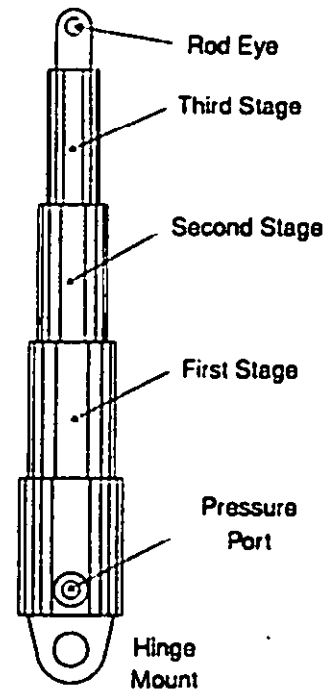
Hydraulic Piston Actuator (Ref. 9)
